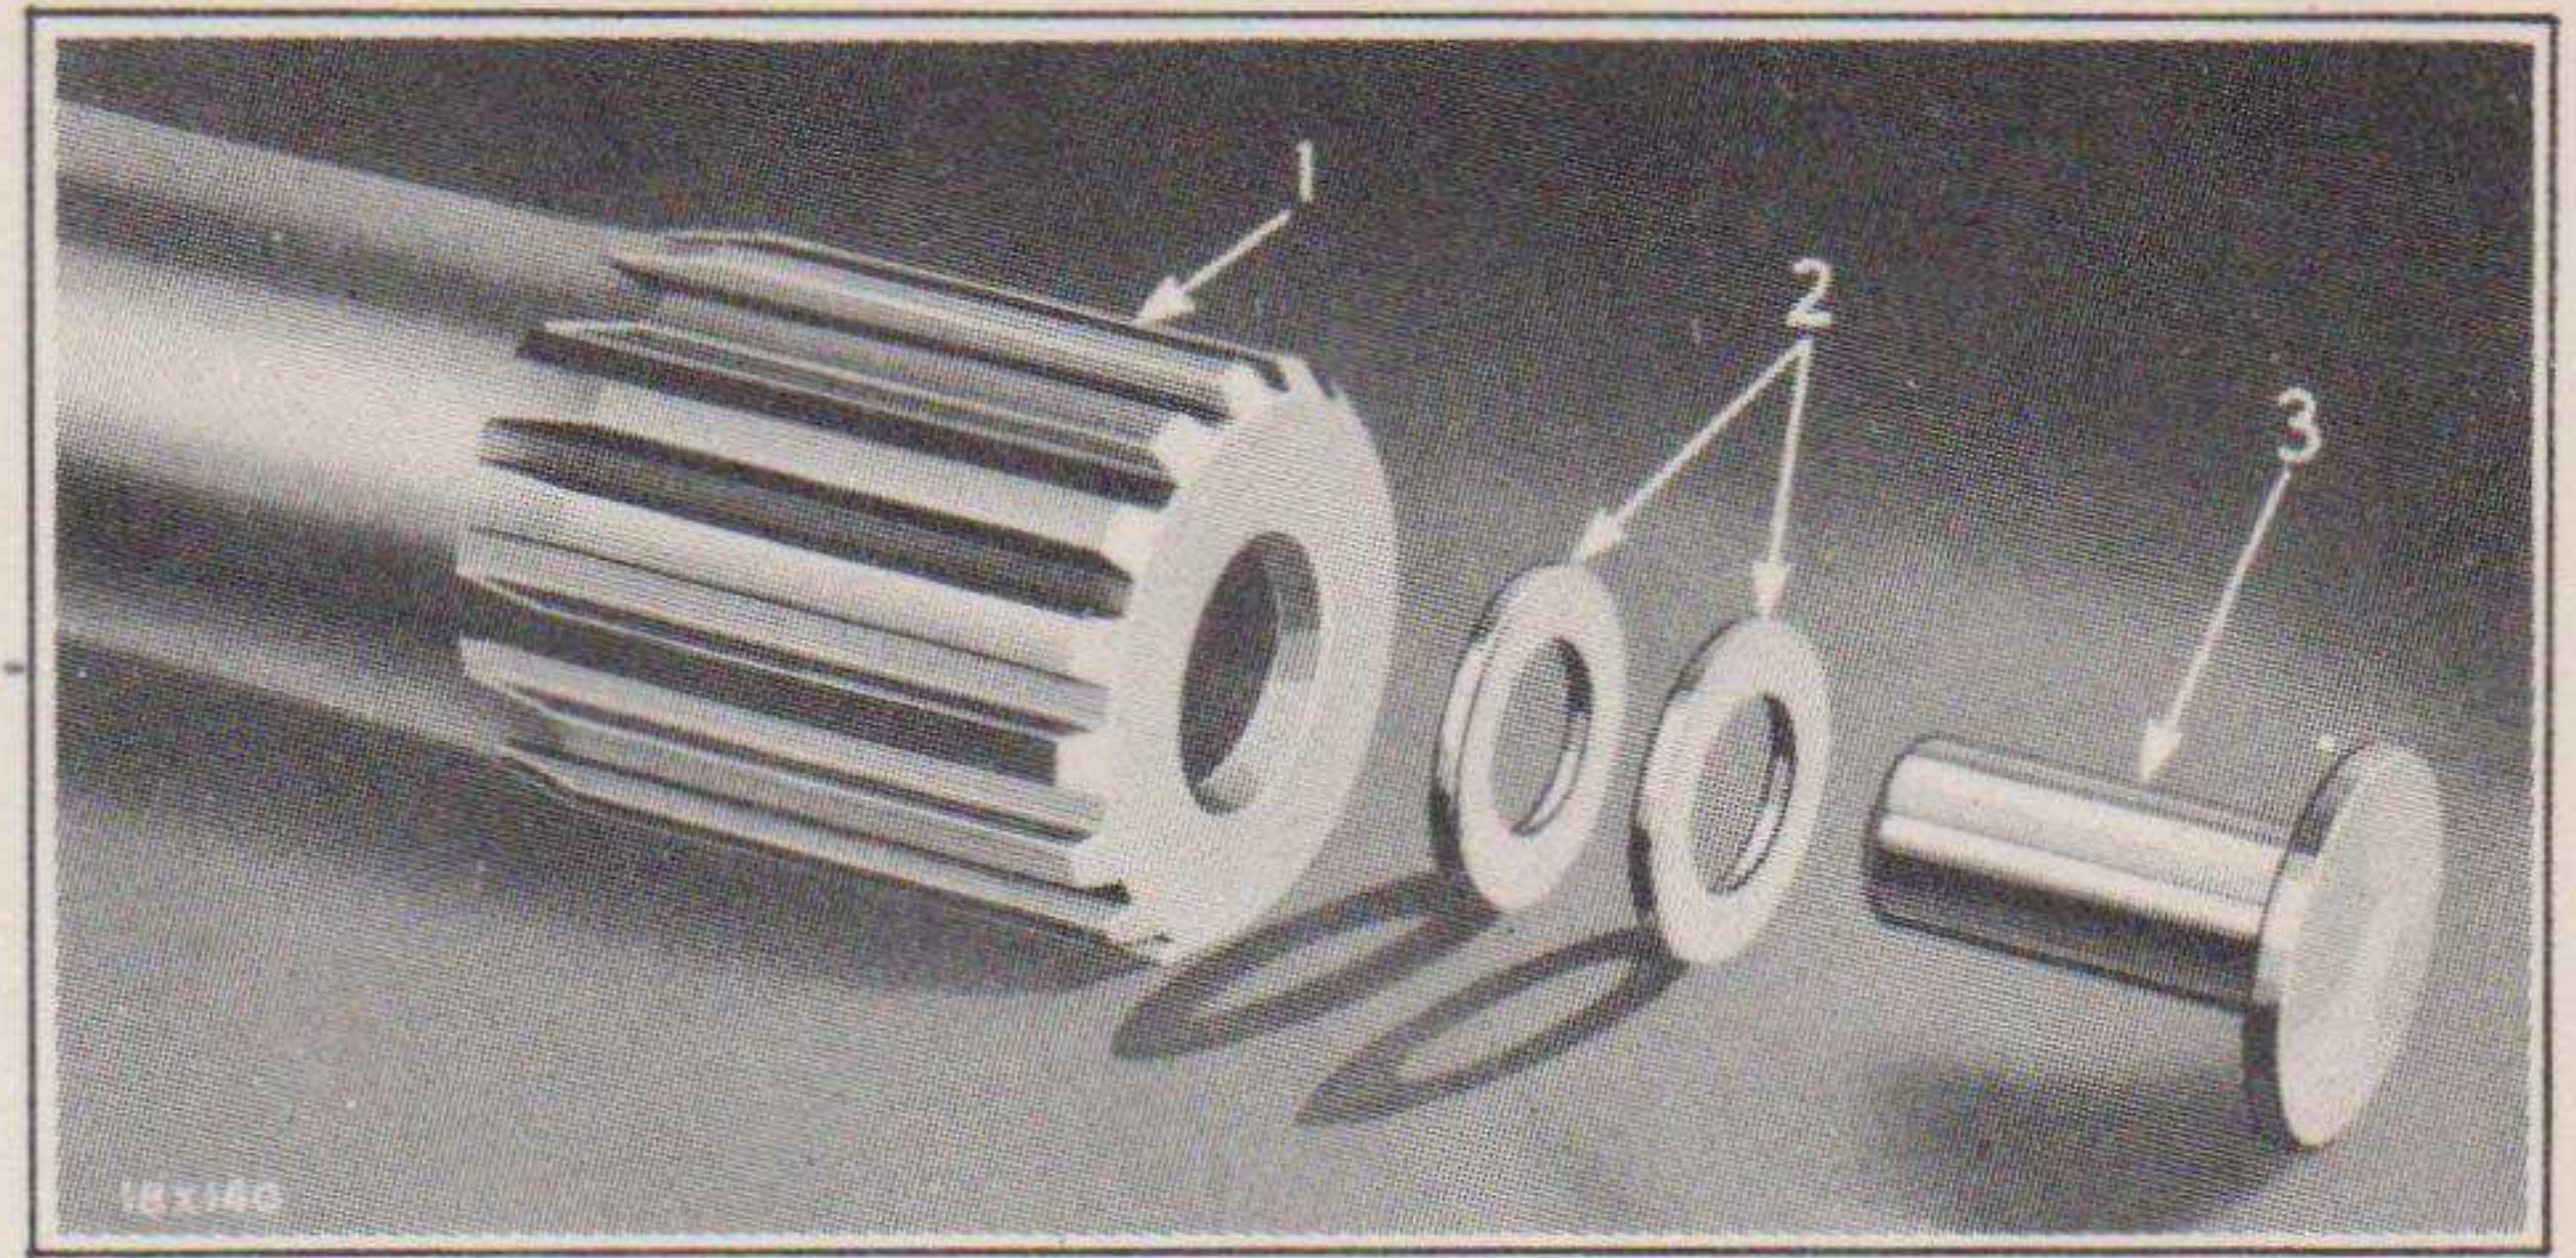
Universal Drive Shaft Thrust Button (Bendix-Weiss)
